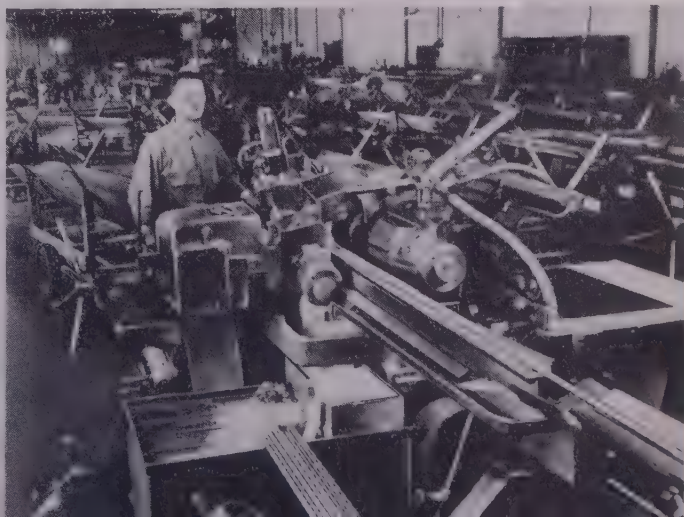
Centerless grinding stainless wire to remove surface defects and produce accurate size and pleasing finish
